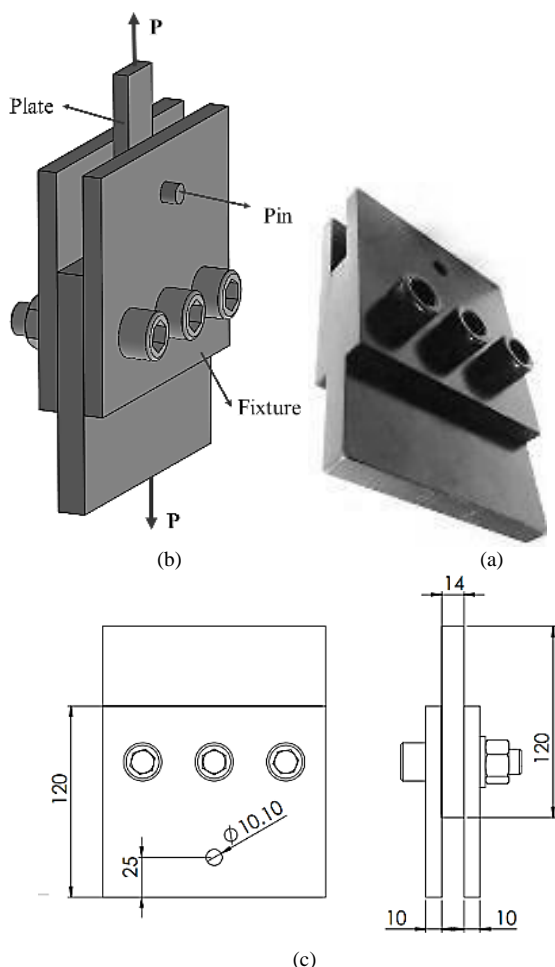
a) Fixture used in fatigue experiments b) schematic of applying cyclic load on it and c) its dimensions
